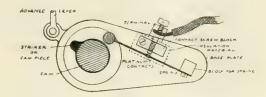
POSITIVE "MAKE" CONTACT-BREAKER.
